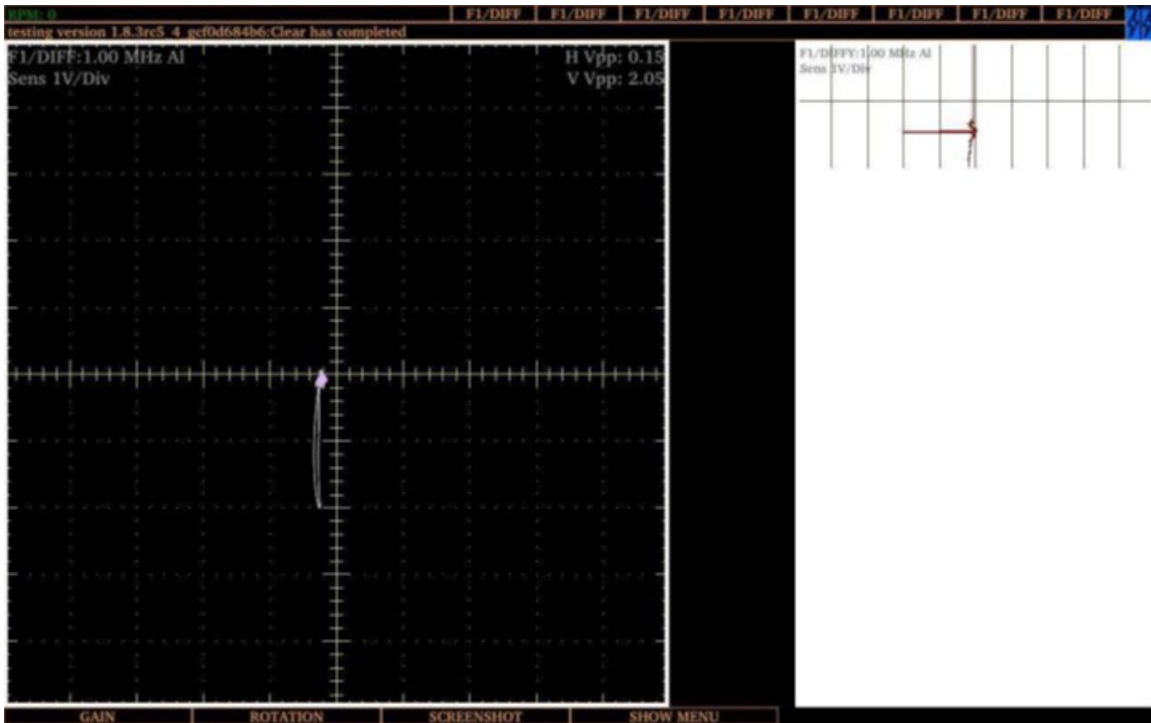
ET indication of defect at Location D in butt weld test panel TTCl-2
